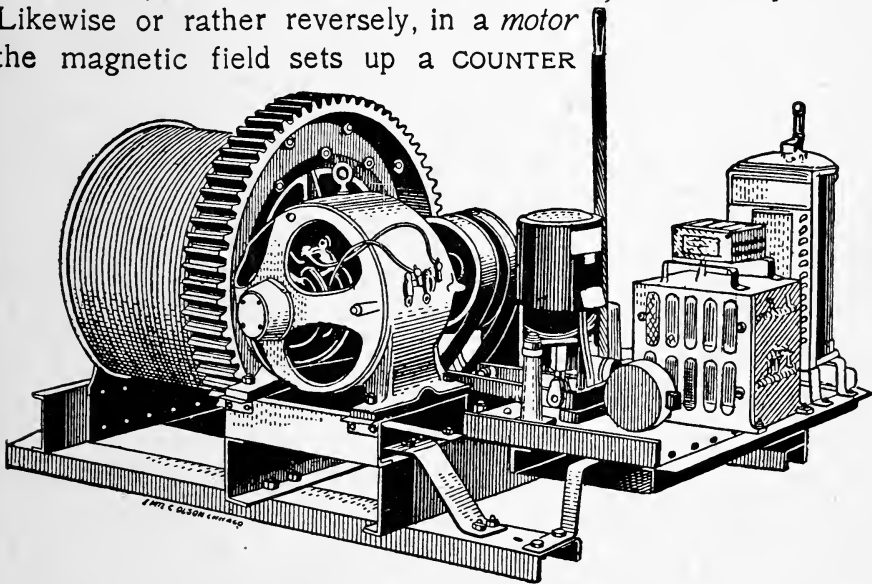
ELECTRICAL HOISTING MACHINE.
